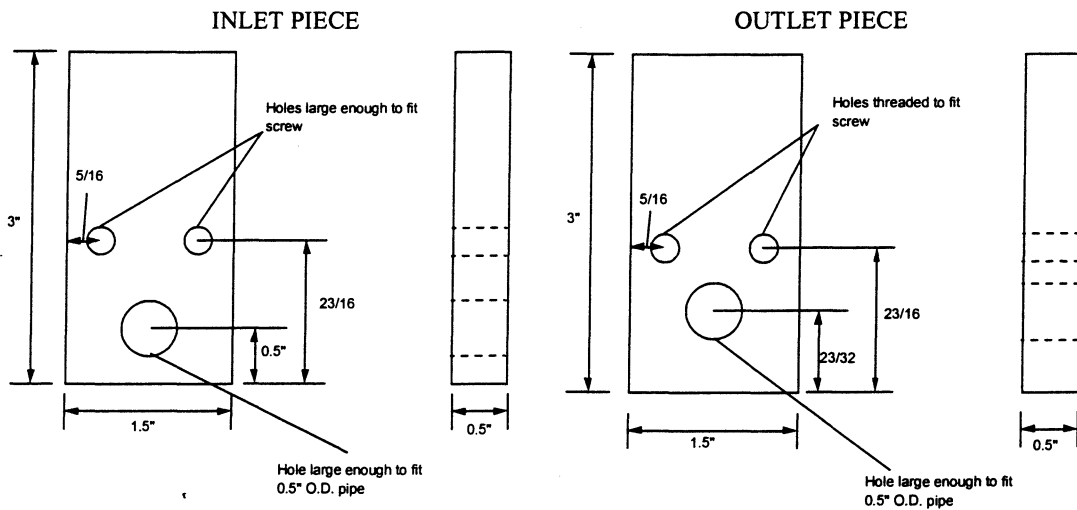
Block design for one of the tested thermostatic expansion valves
